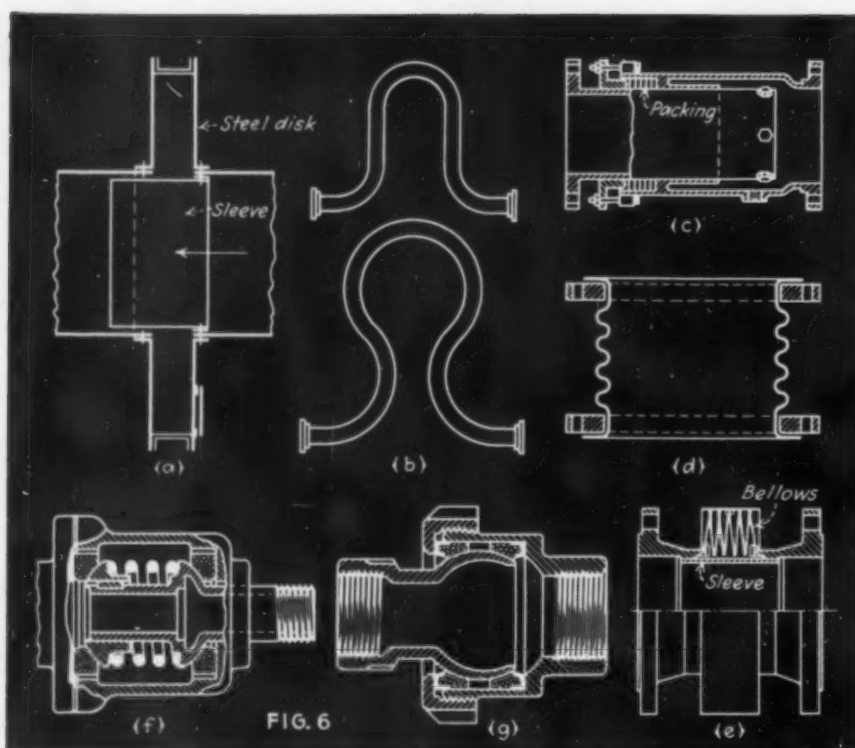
(a)-(e), Typical expansion joints; (f)-(g), rotary and flexible joints
